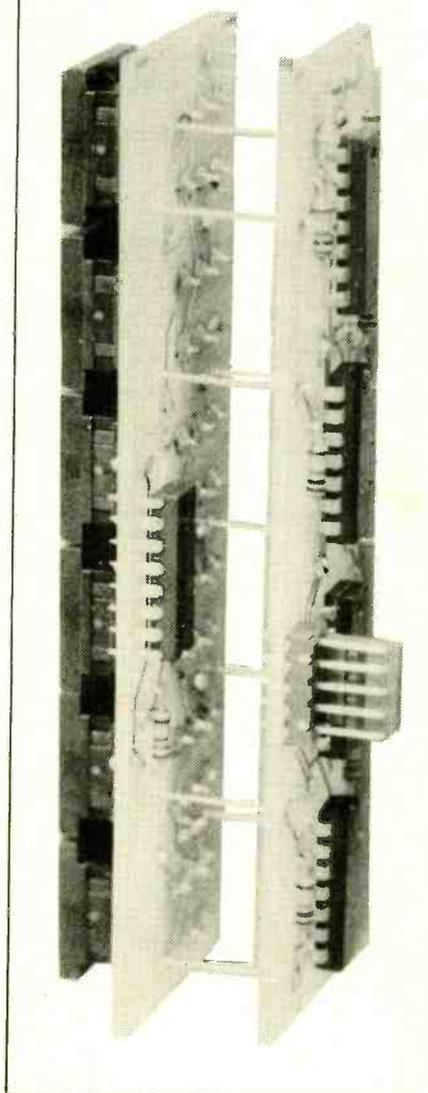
Component overlay of the latch module boards which are both double-sided.
